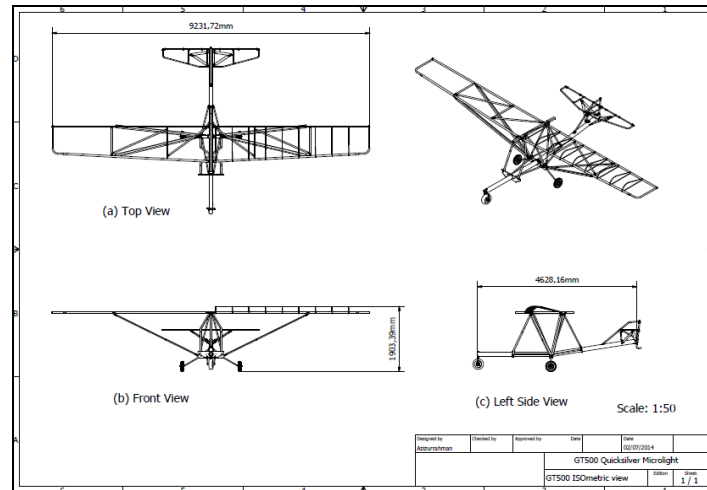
(a) Top view of CAD design for Quicksilver GT500 microlight aircraft structure. (b) Front view of CAD design for Quicksilver GT500 microlight aircraft structure. (c) Side view of CAD design for Quicksilver GT500 microlight aircraft structure.
